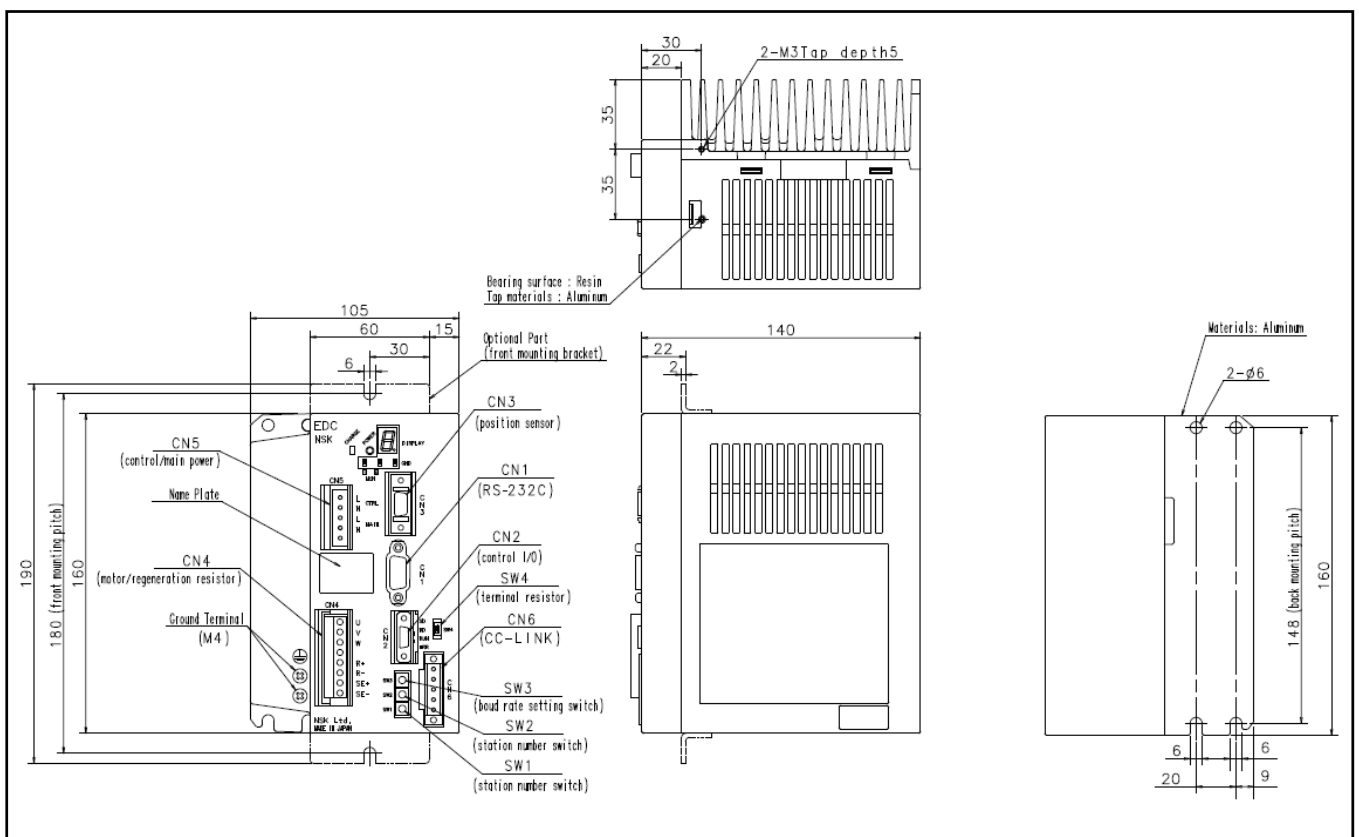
CC-Link Compatible EDC Driver Unit for PX3050 type Motor
